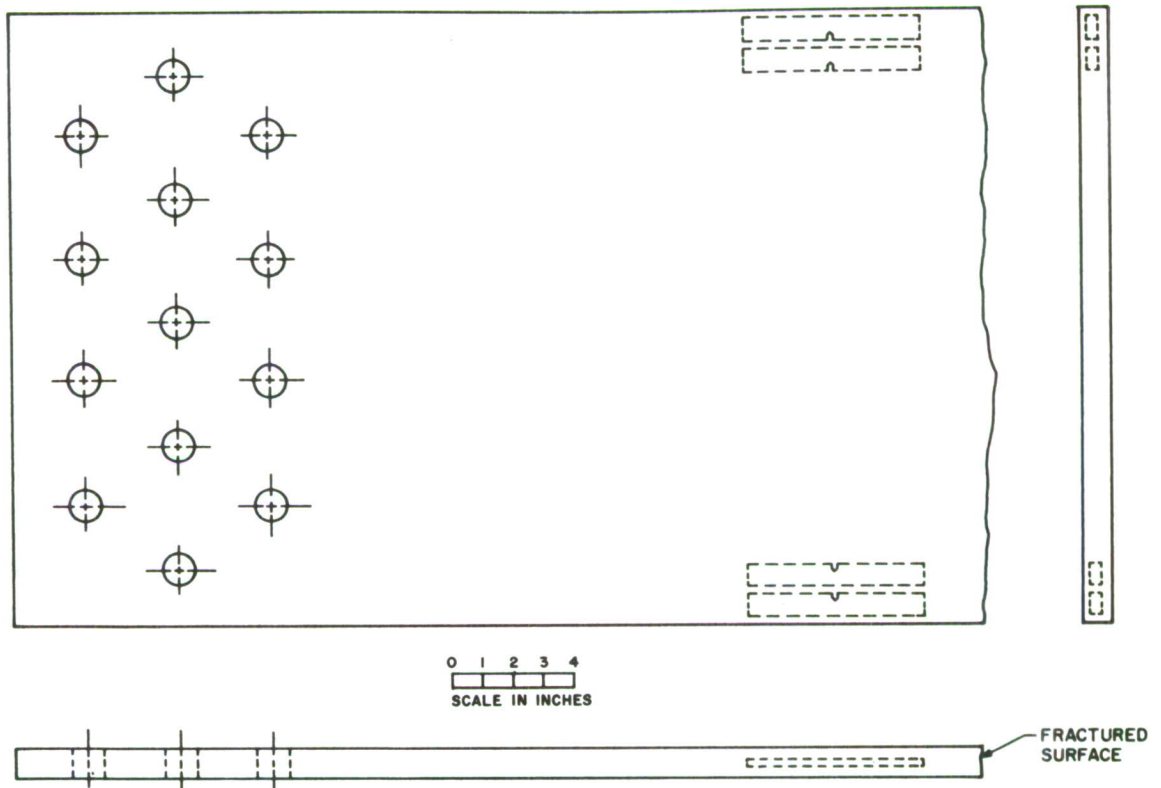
Large Aluminum Plate and Area of Specimen Removal
